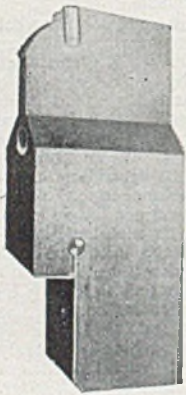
(right).—Multiple tool fixture for simultaneous machining of all grooves in a piston showing adjusting device and adjustment for median machine diameter.
